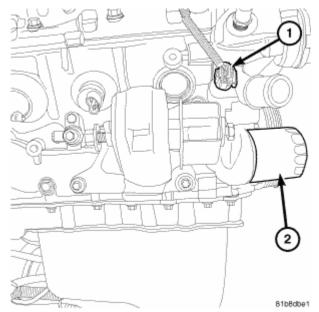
3.8L Oil Pressure Switch Courtesy of CHRYSLER LLC
